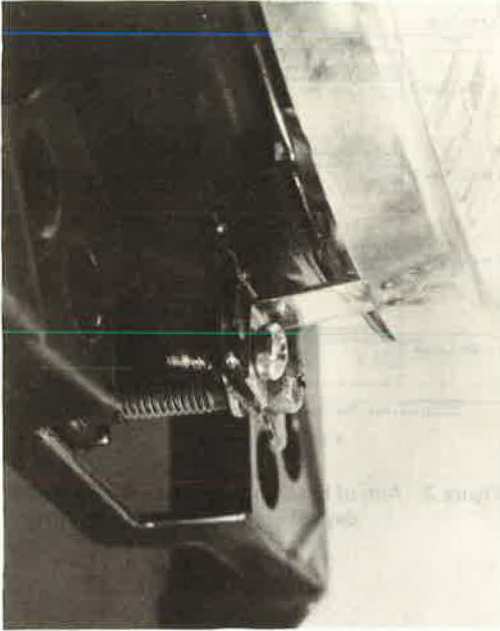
This fastening arrangement for the head-lamp retaining ring can lead to the stripping of threads in the mounting hole and consequent loosening of the assembly as shown.
